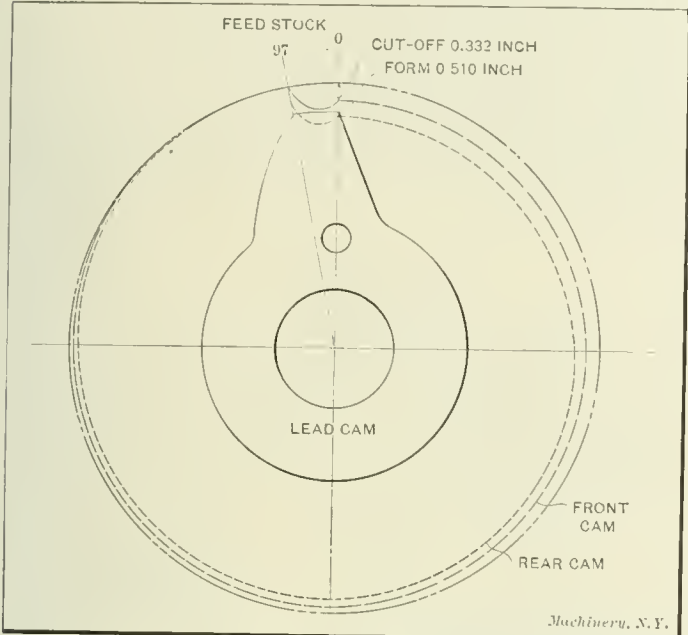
Cams for Making the Piece shown in Fig. 2 by the Method shown at B
